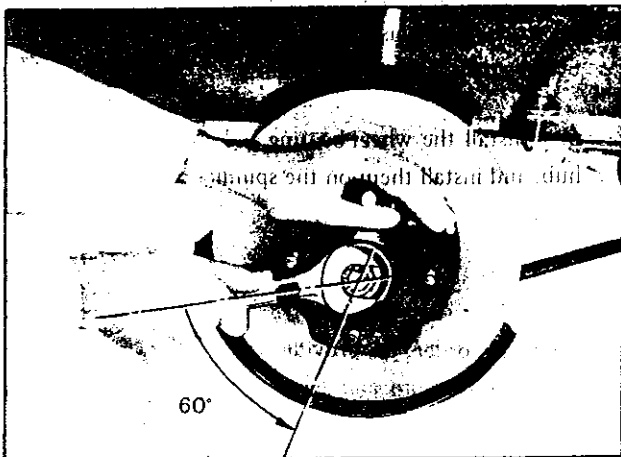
Returning wheel bearing lock nut  $60^\circ$
